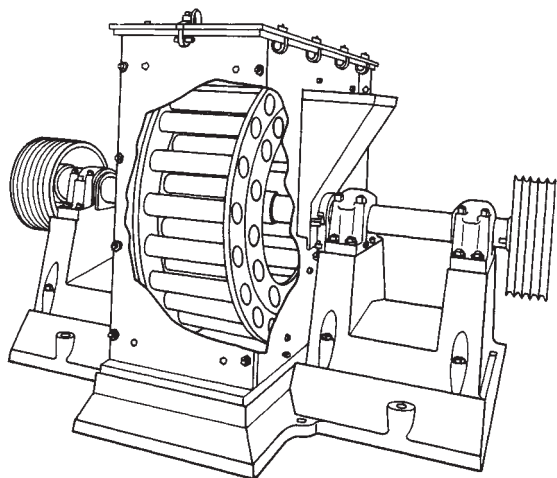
Two-cage disintegrator. (Stedman Machine Co.)
